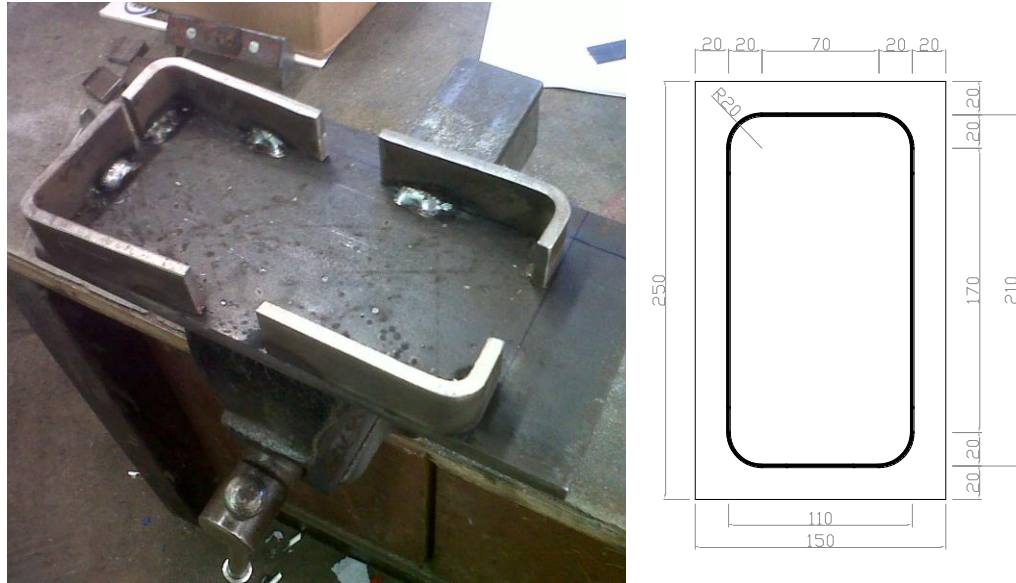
Bending jig for the GFRP shear links (left) and detailed geometry (right - measurements in mm)
